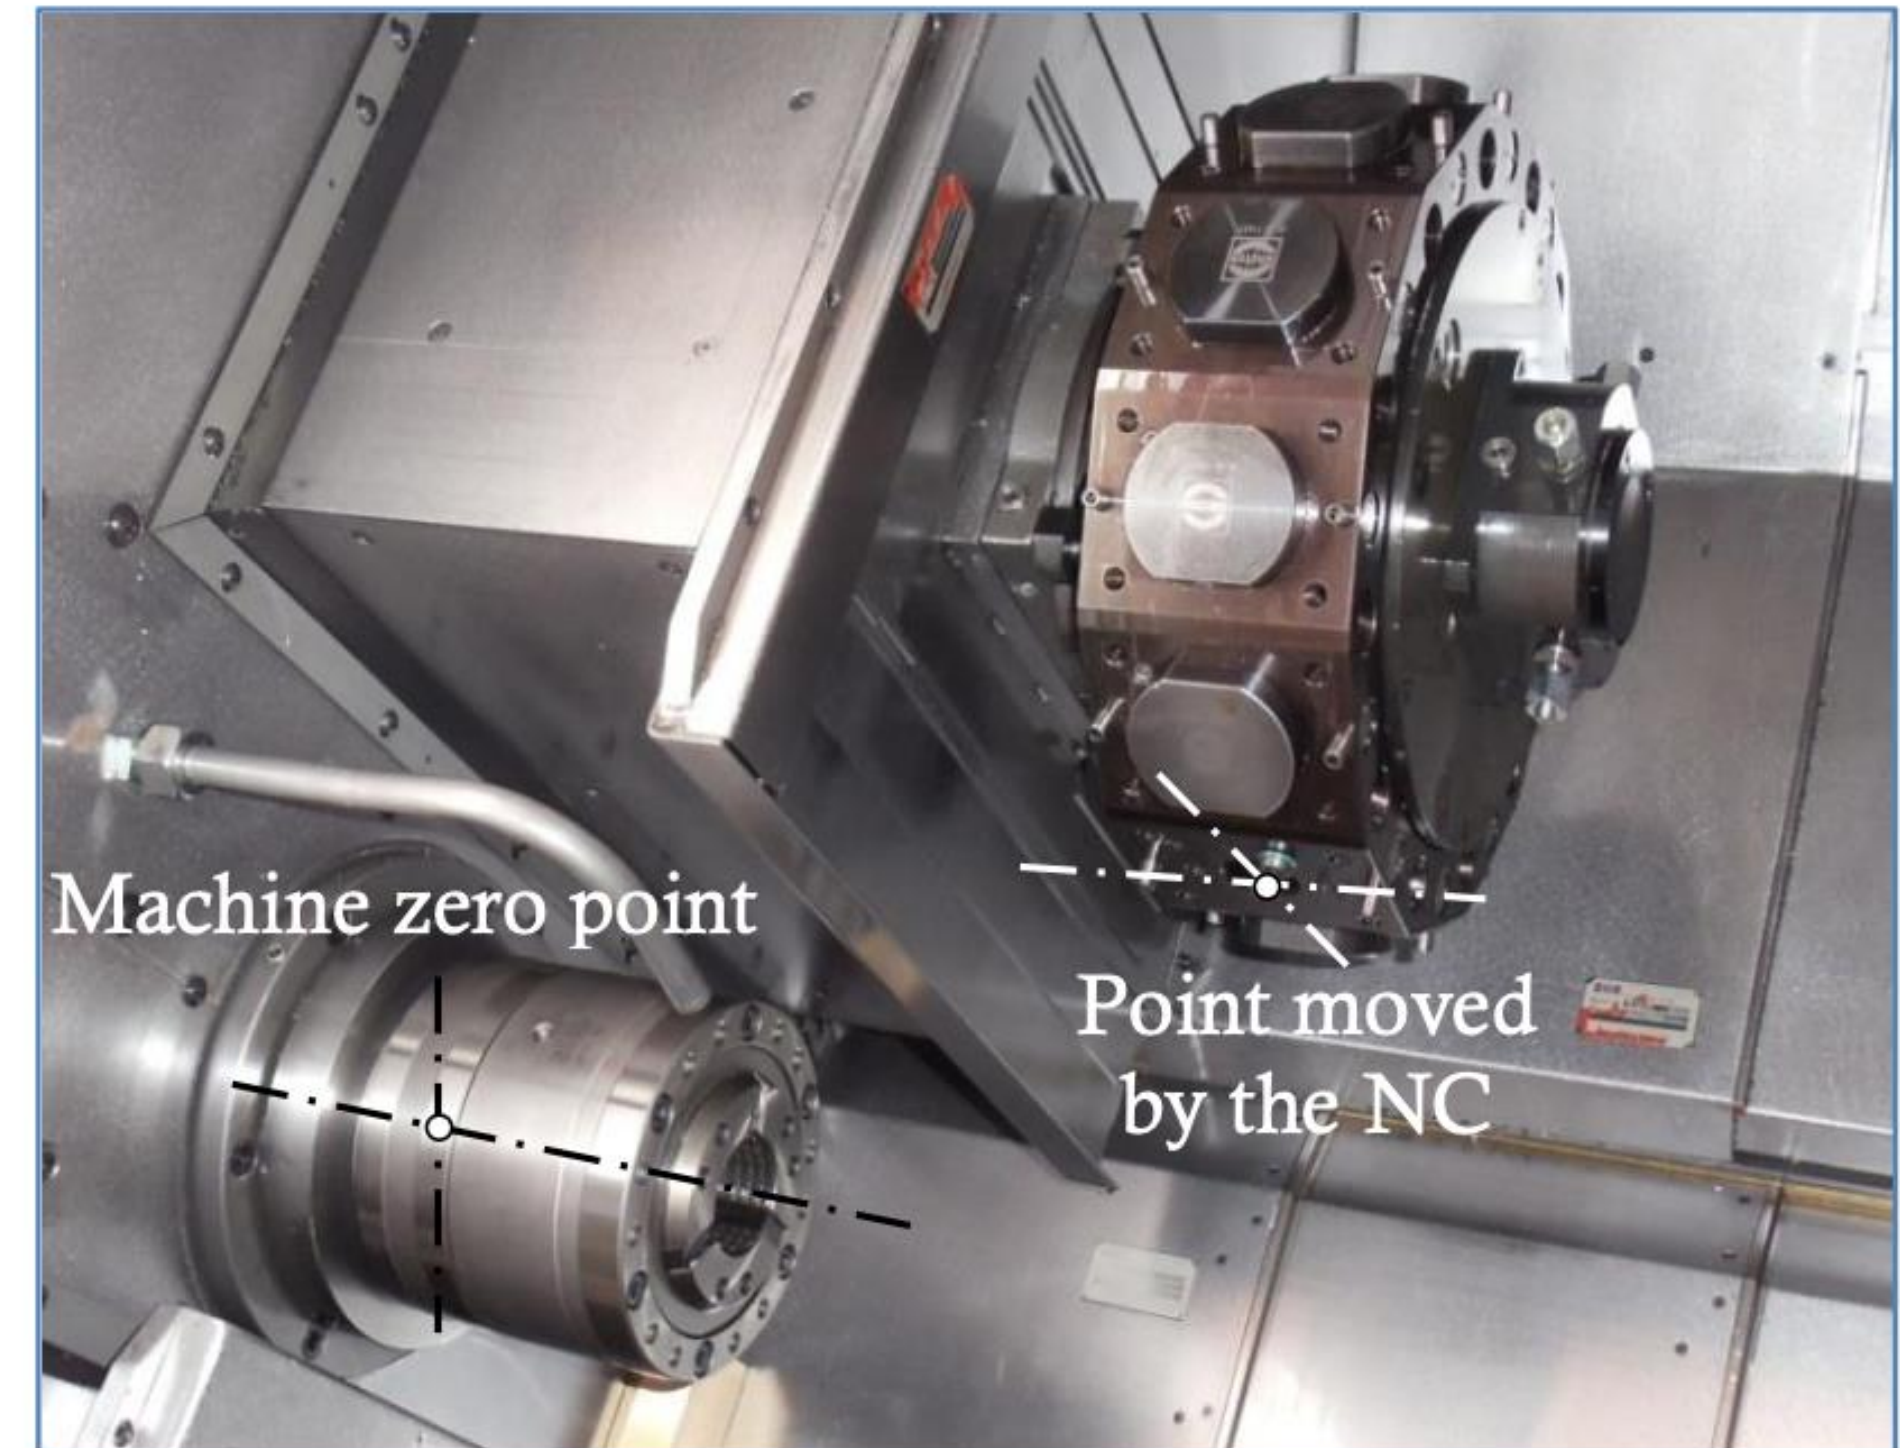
Machine coordinate system: point moved by the NC referring to the machine zero point
